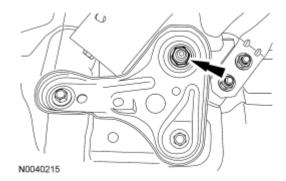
Locating Subframe Brackets And Bolts Finger-Tight Courtesy of FORD MOTOR CO.
